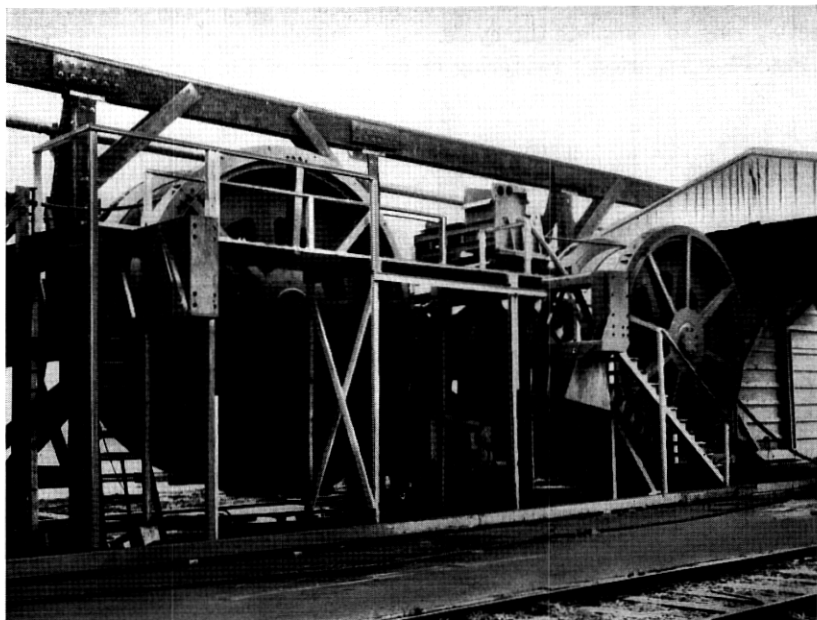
Cable engine drums set up for manufacturer's tests.
